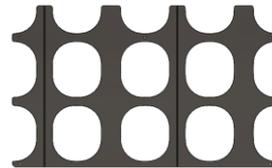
CAD Part - 0022-DE-CAD-008 - SMALL PLANTER STAND
